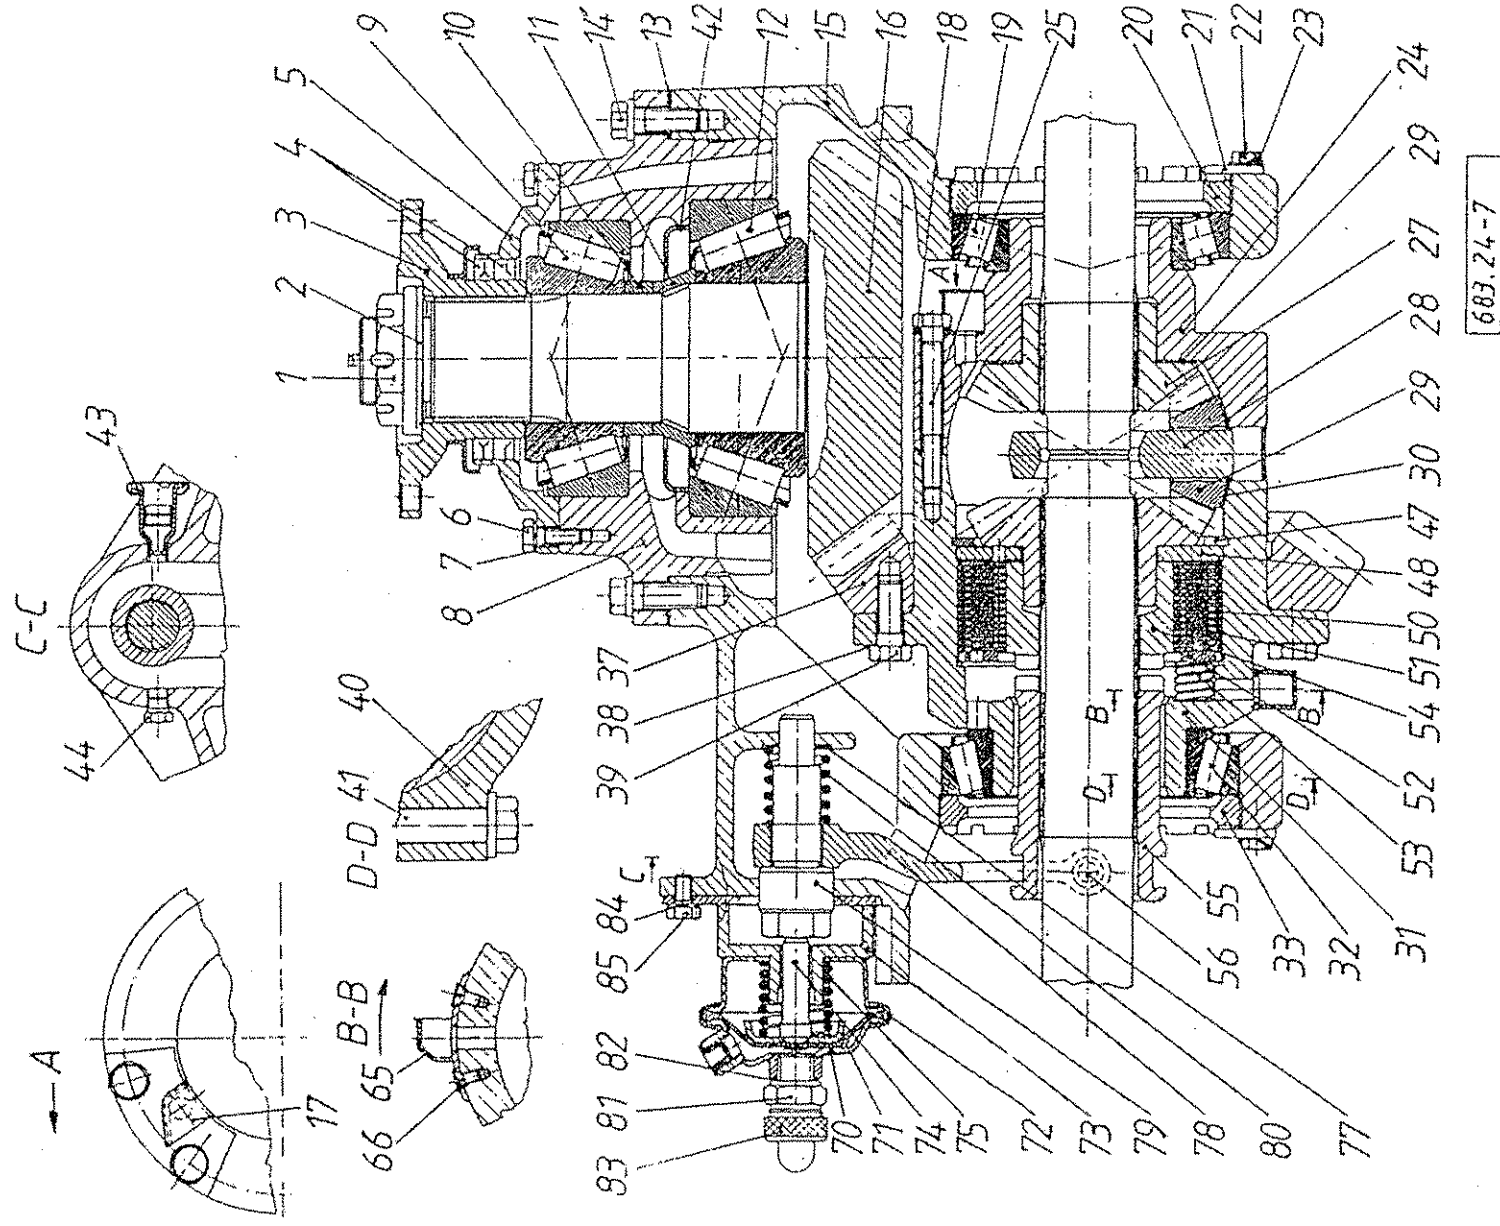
LIMITED SLIP DIFFERENTIAL CARRIER ASSEMBLY SECTIONAL VIEW
